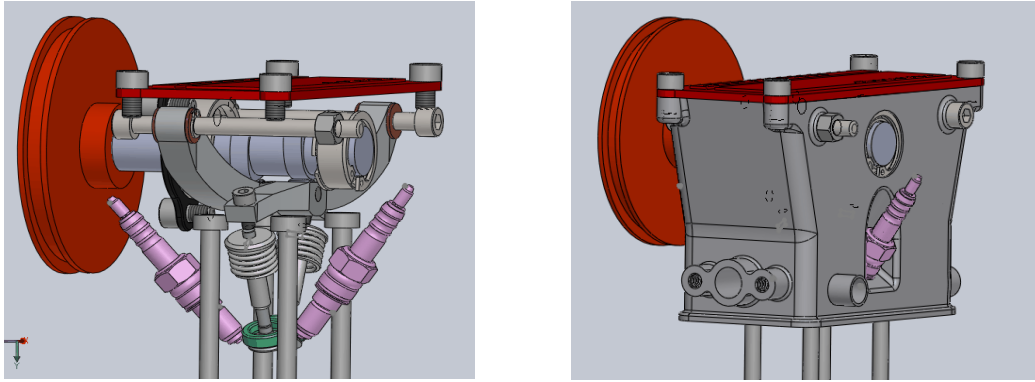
Engine head interior assembled components (left) and full assembled engine head (right).
